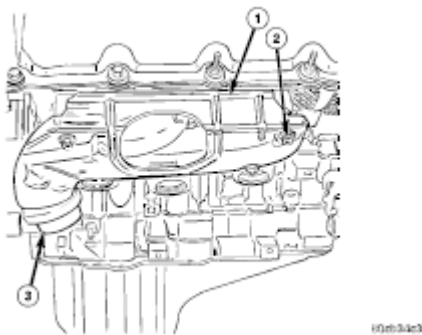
Identifying Exhaust Heat Shield (Right Side)
